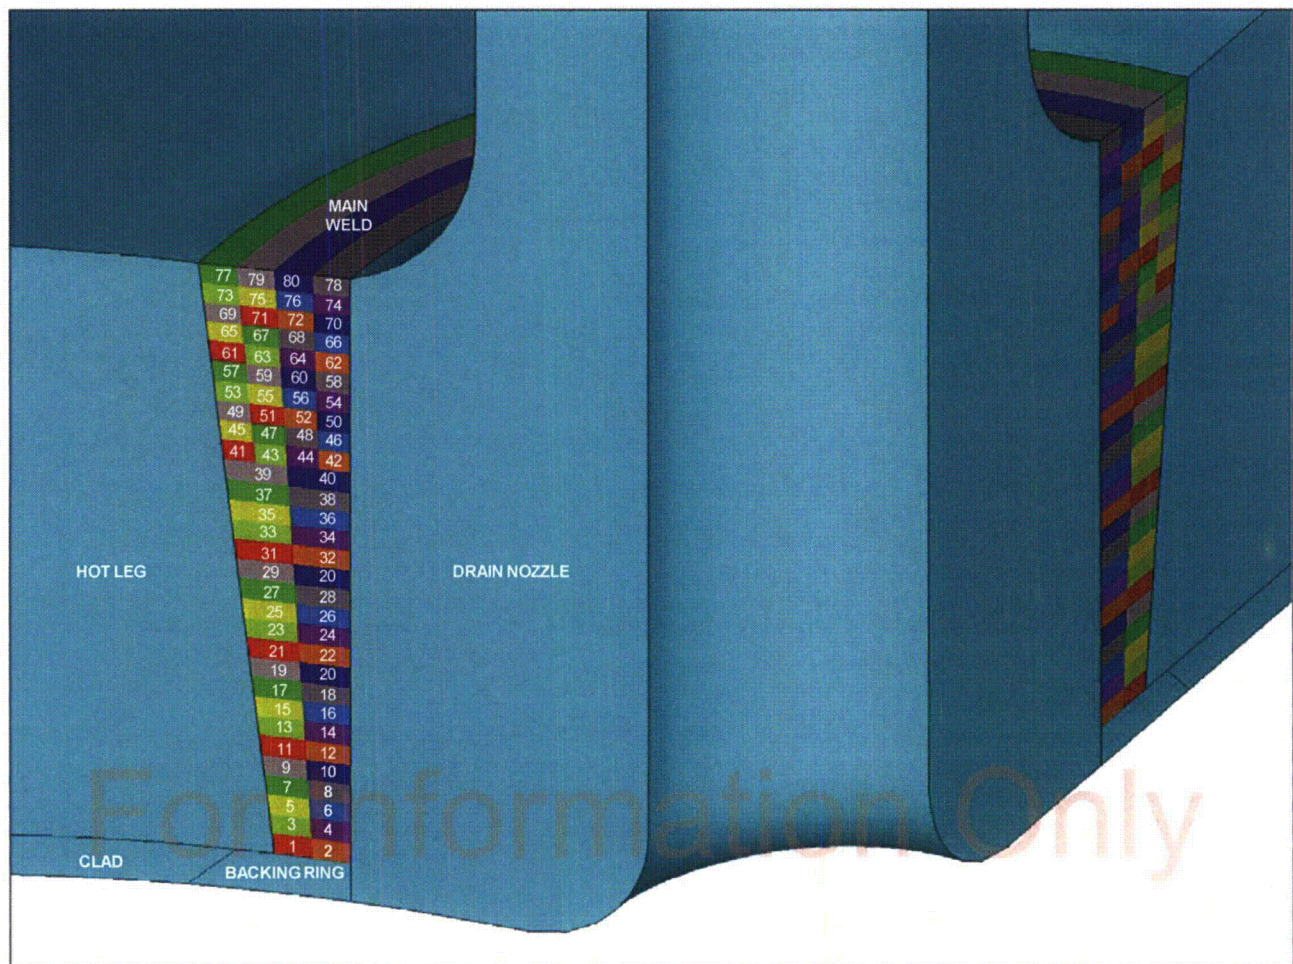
Weld Nugget Definitions for the Boss Main Weld
